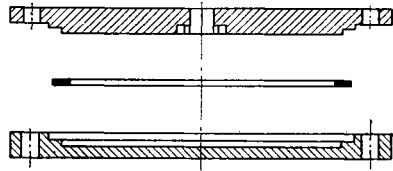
Stepped seal with flat copper ring gasket.
